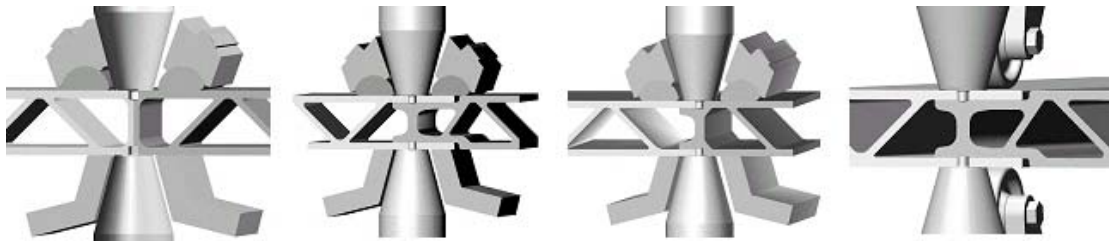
Designs which make it possible to weld hollow profiles.
